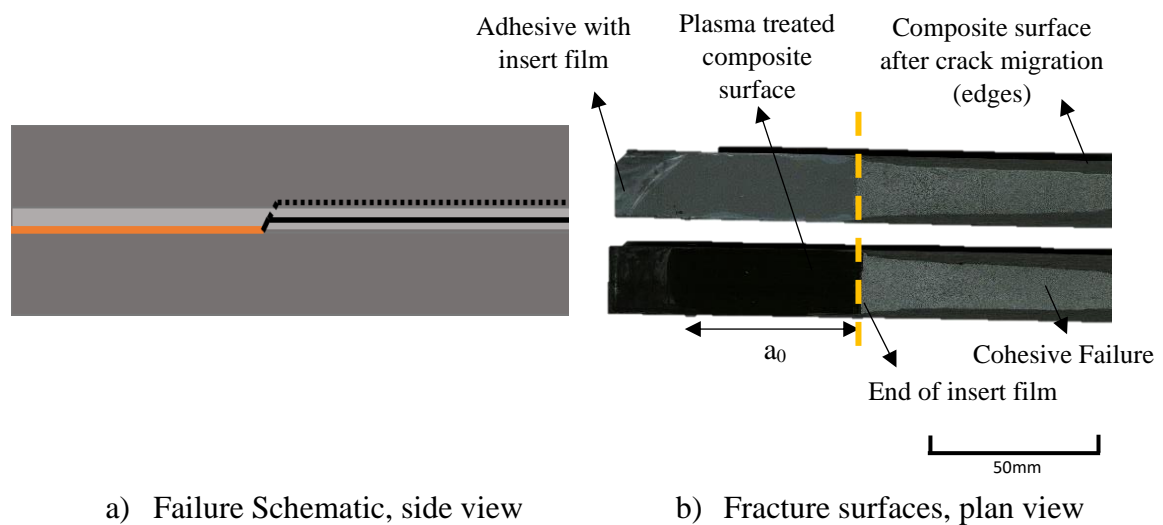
Failure schematic and fracture surfaces for the plasma treated 0.2 mm DCB specimens where the solid lines represent the primary failure mechanism and dotted lines represent the secondary failure mechanism at the edges.
